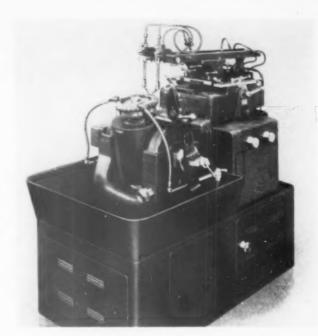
Gleason No. 1 Surface Hardening Machine.
